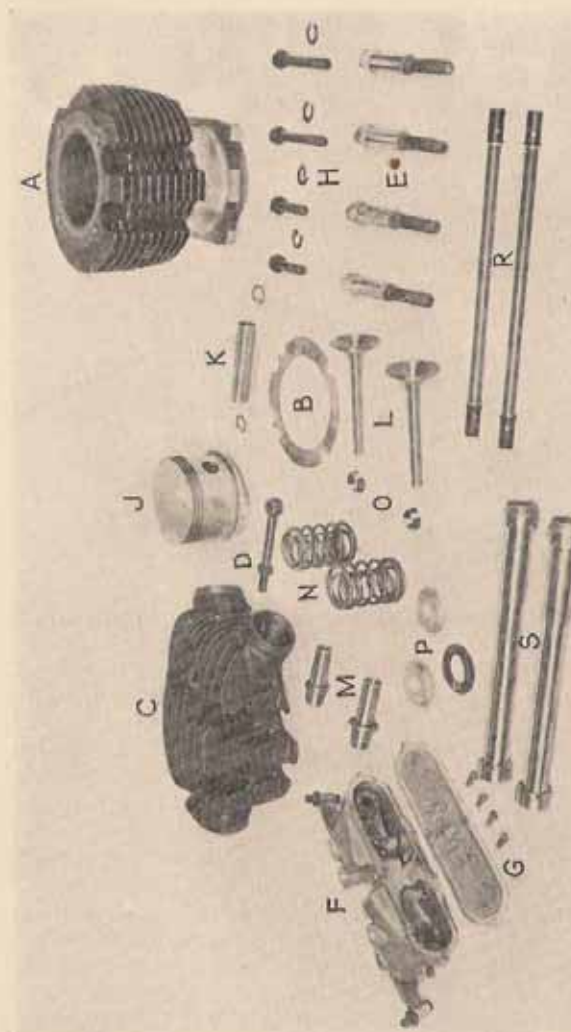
COMPONENT PARTS OF OVERHEAD VALVE MECHANISM OF THE 3-49 H.P. AND 4-98 H.P. MODELS
